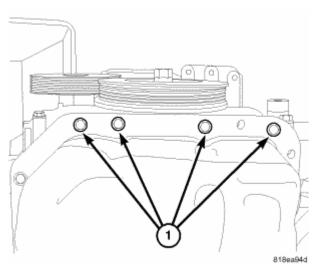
TIMING CHAIN COVER LOWER BOLTS Courtesy of CHRYSLER LLC
